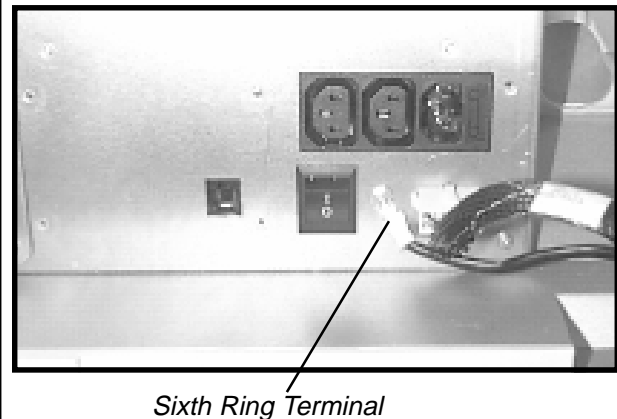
Sixth Ring Terminal connected to Power Supply PN 09800-02039.
